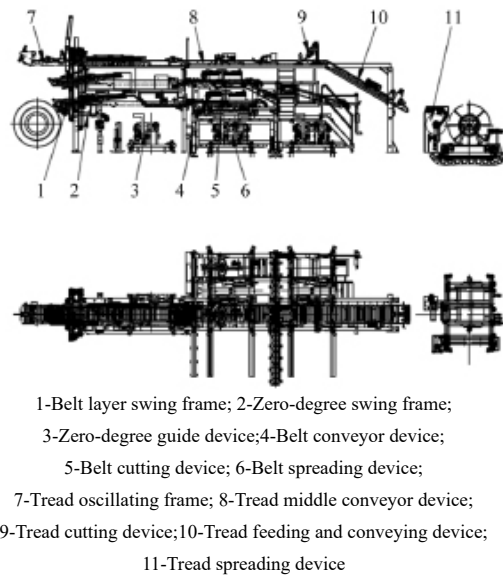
Feed device for belt drum workstation of traditional light truck forming machine
